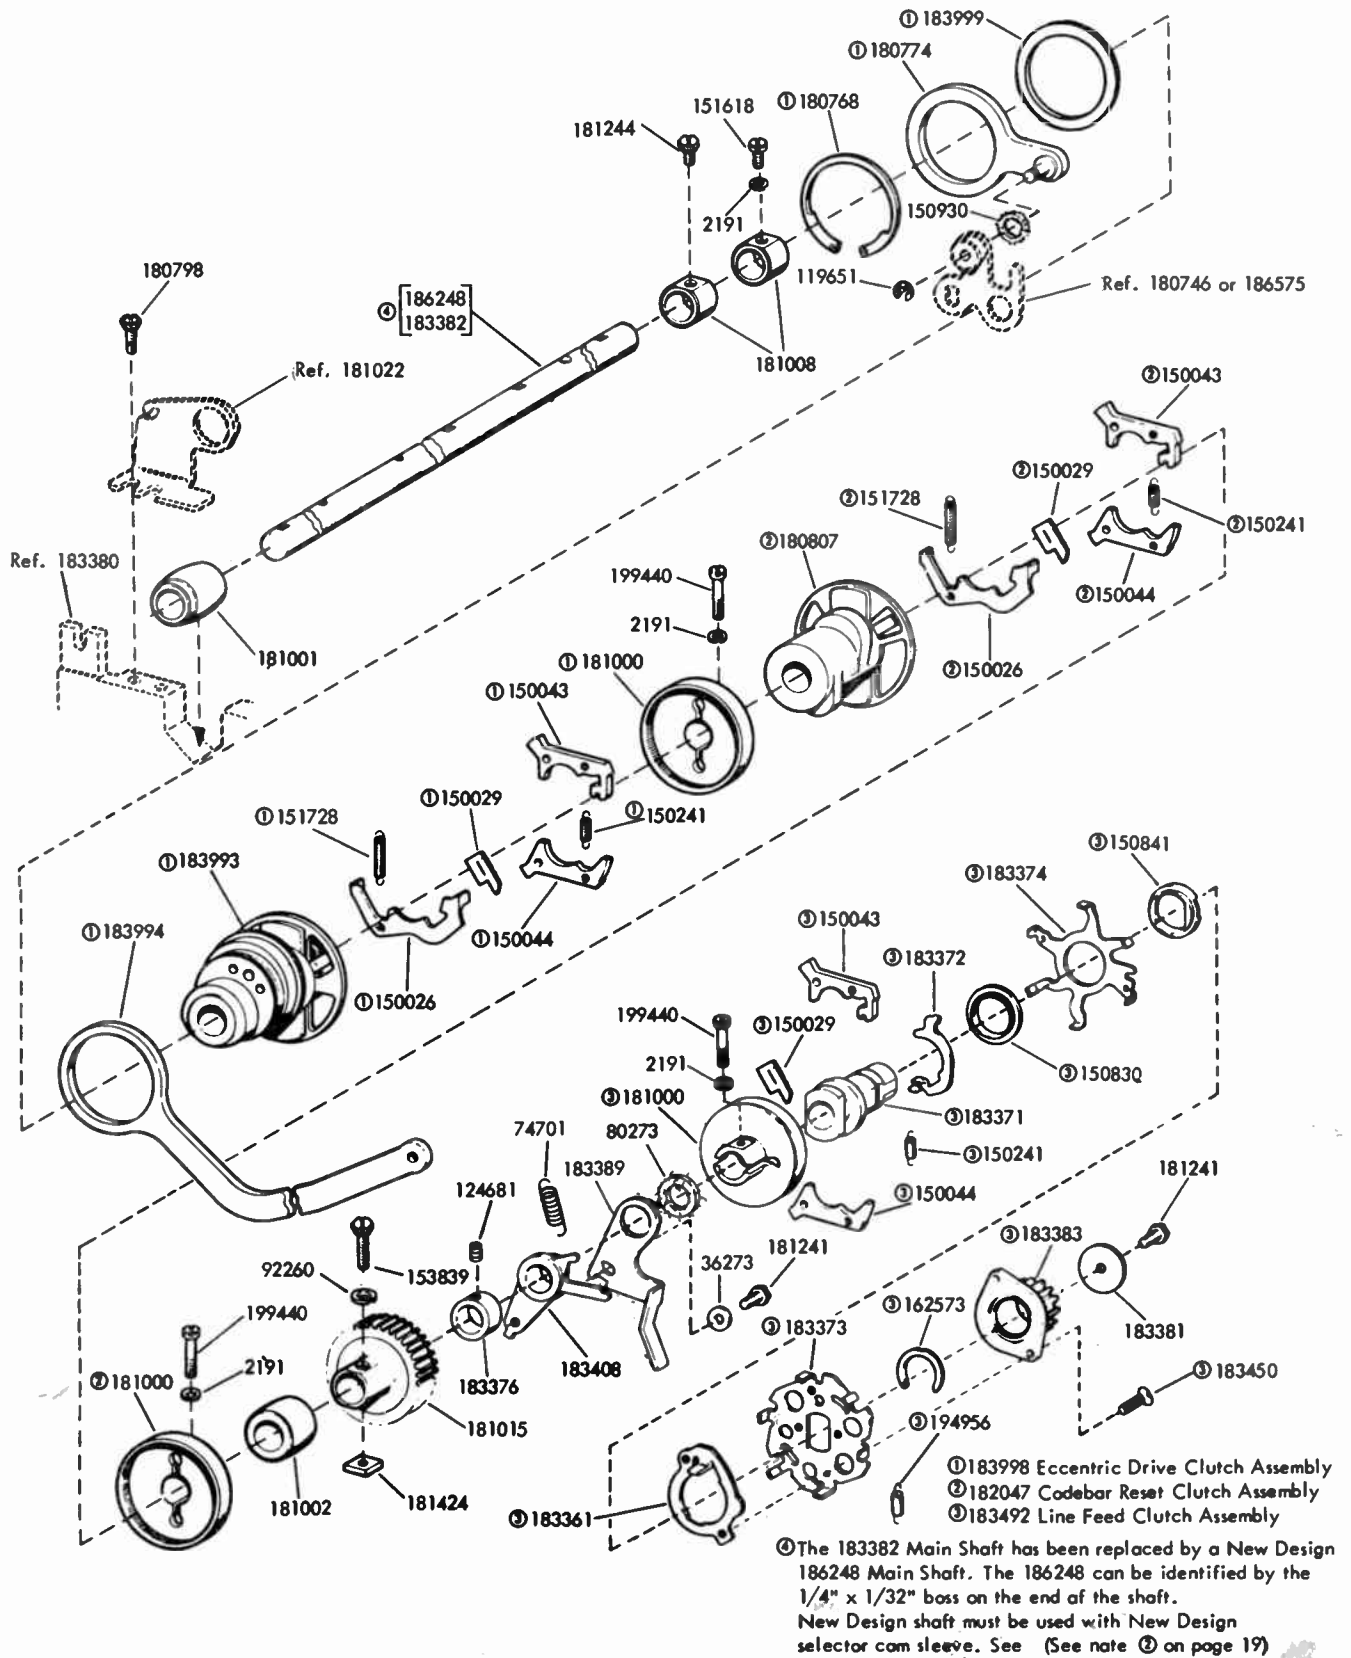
MAIN SHAFT MECHANISM - SPROCKET FEED
